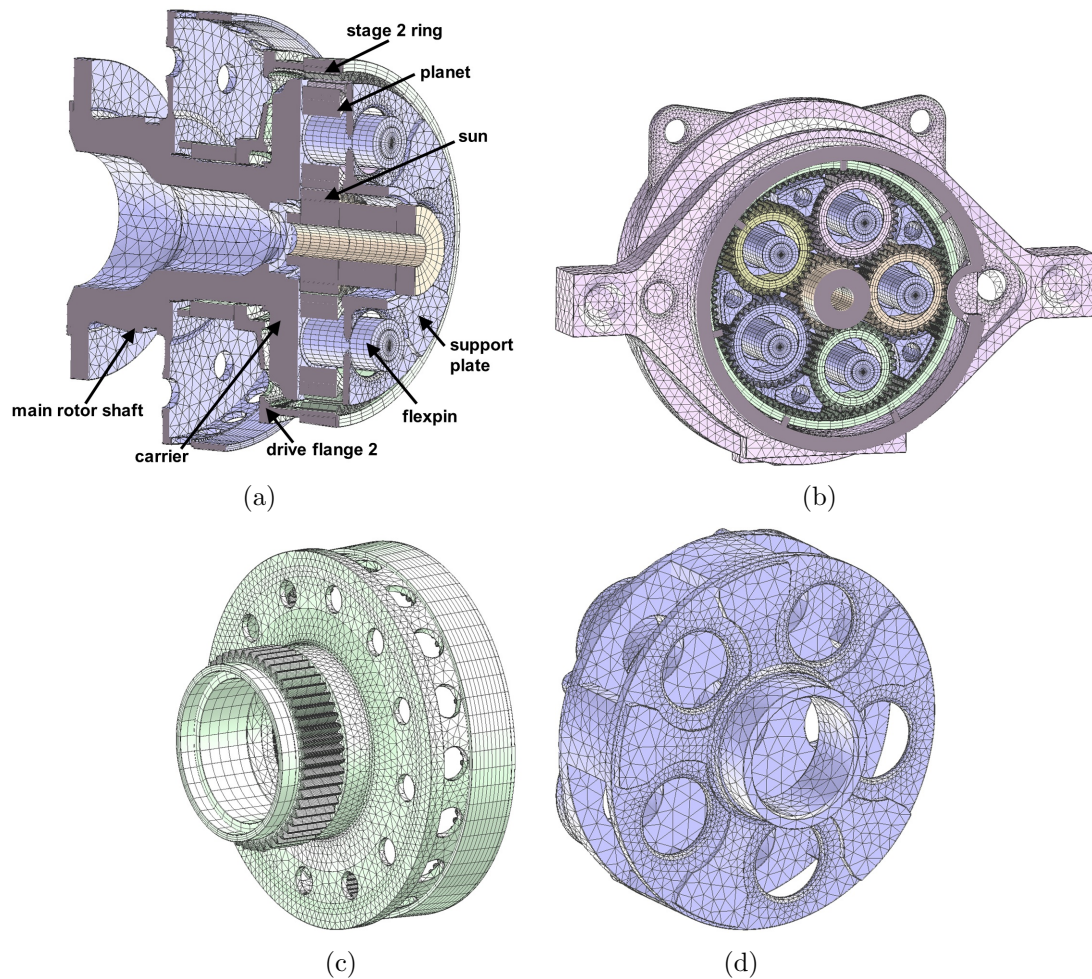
(a) Cutaway view of the finite element model of stage 2 on the FC5500, (b) view of stage 2 from the back of the gearbox, (c) drive flange 2, and (d) the stage 2 carrier and support plate.
